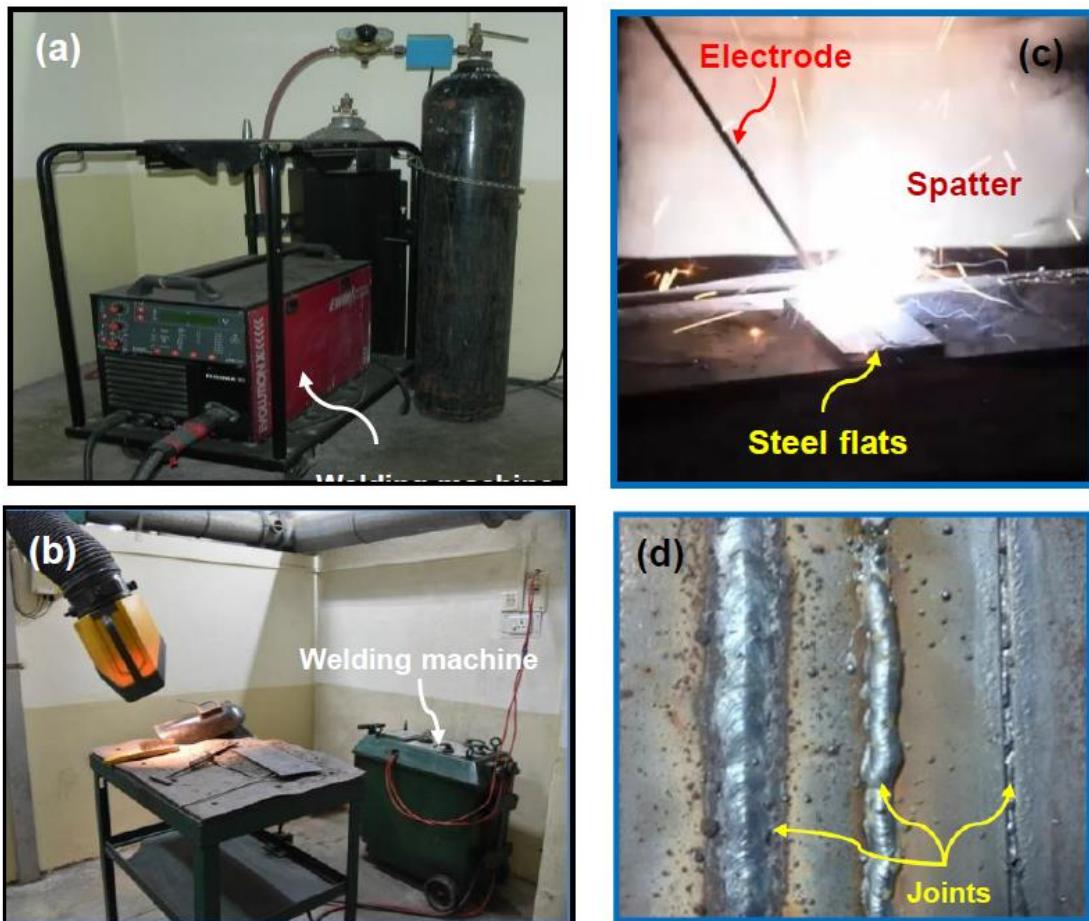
Welding machines in TA211 lab: (a) MAG and (b) MMAW. (c) Welding process, (d) Joints using MMAW and MAG.
